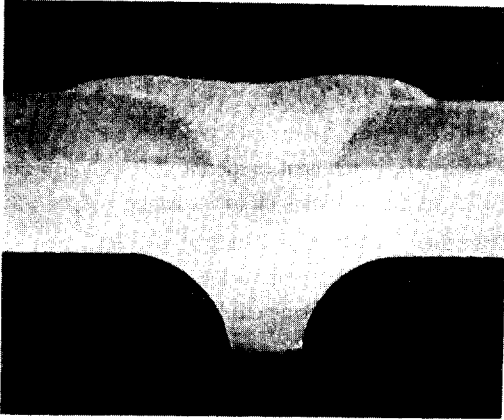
Macrostructure of spot welds in transverse cross-section
